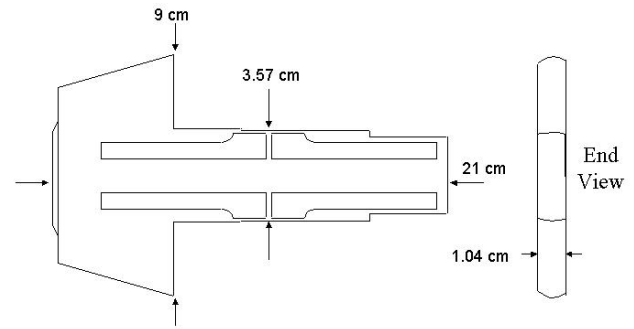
Schematic drawing of the location of the modified Bruggen samples machined from pinion blanks.
